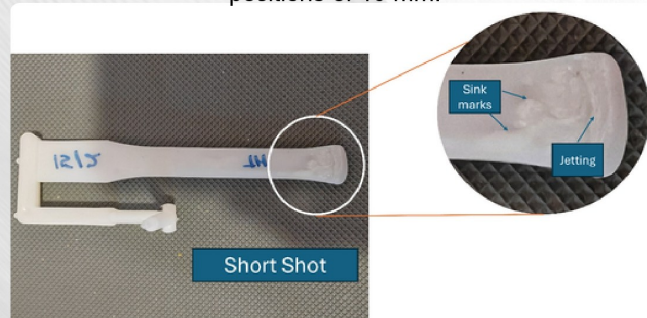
Injection moulded part produced at injection end positions of 15 mm.
